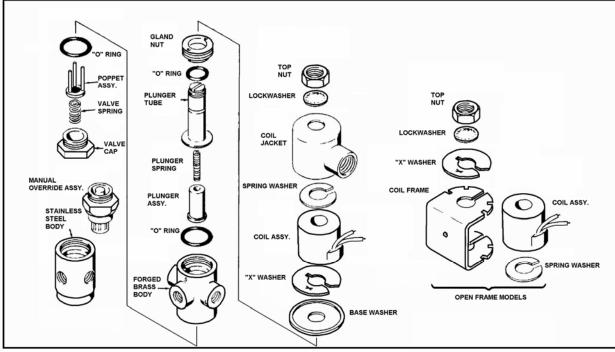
Exploded View of Typical S33 Standard and Open Frame Models
